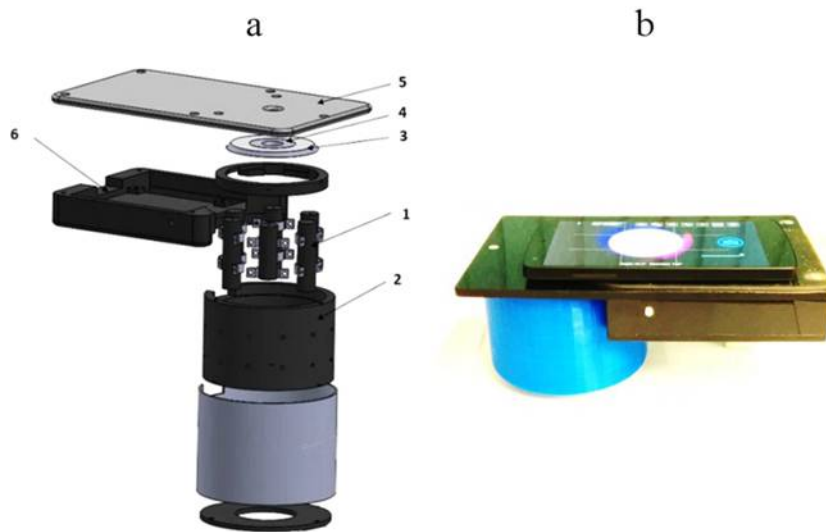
Design scheme of the 3-wavelength laser add-on illuminator (a) and the mobile prototype with smartphone on it (b): 1—laser modules (3 pairs, 448-532-659nm), 2—shielding cylinder, 3—collector of laser beams, 4—flat ring-shaped diffuser of laser light, 5—sticky platform for the smartphone, 6—electronics compartment.
